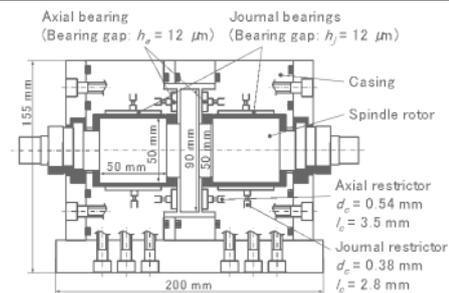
Spindle with water-lubricated hydrostatic bearings [2]
